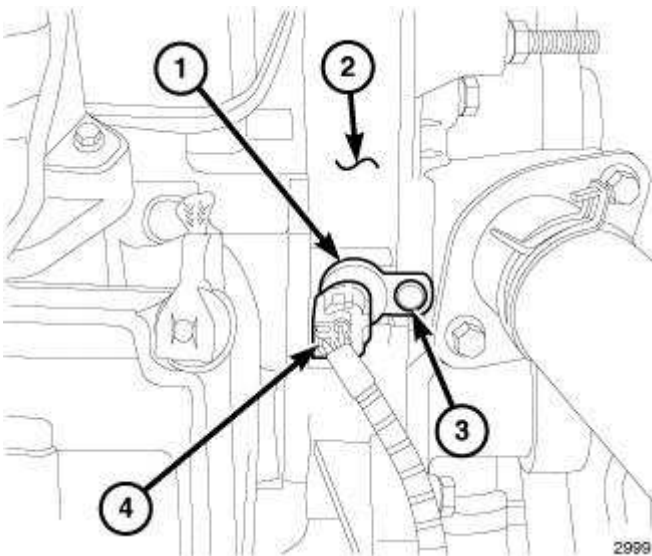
CAMSHAFT POSITION SENSOR-5.7L
